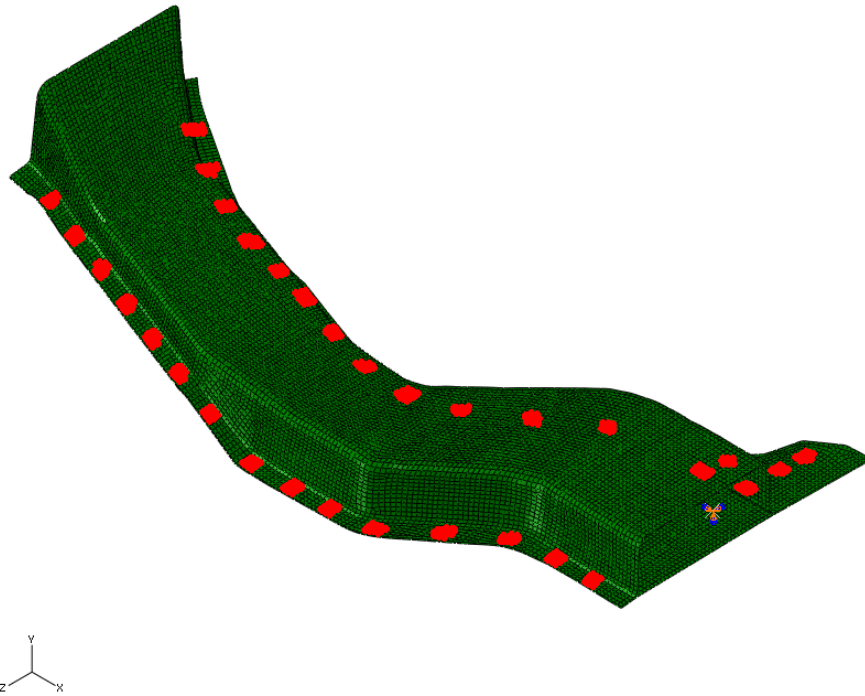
Nodes involved in mesh independent spot weld for a spot weld diameter of 6mm on both side flanges
